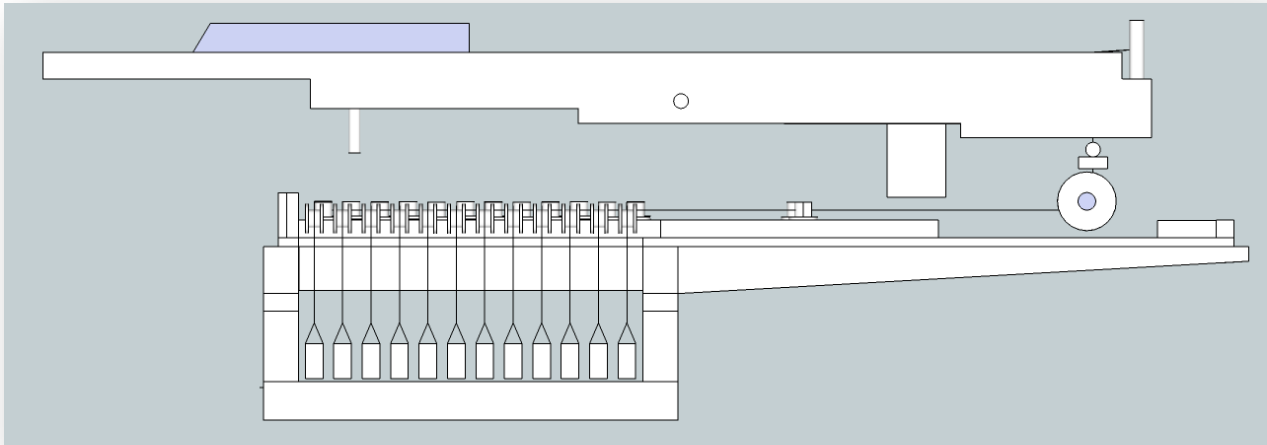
Cross Section through the Keyboard showing the improved Pulley Wheel System
